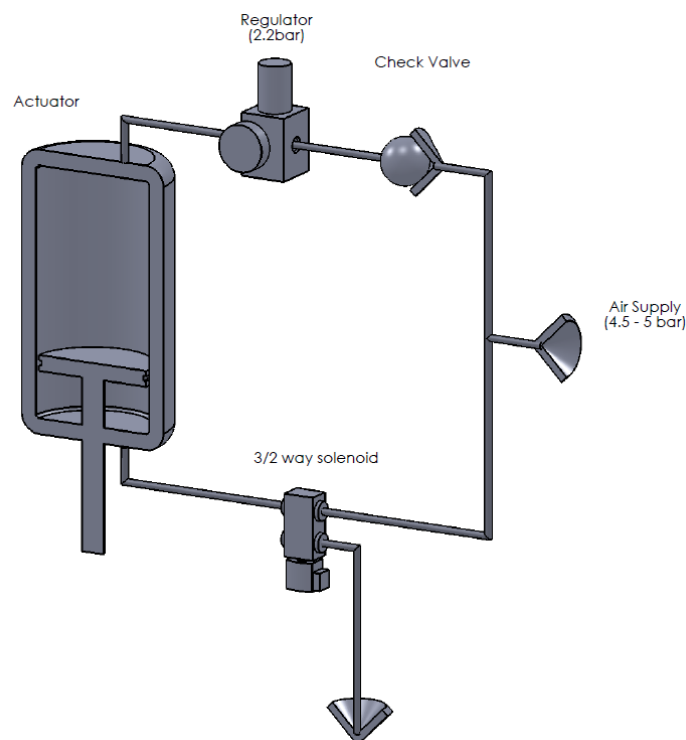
Fail Closed Air Spring Piping. Fail Open would be piped in the opposite sense.
